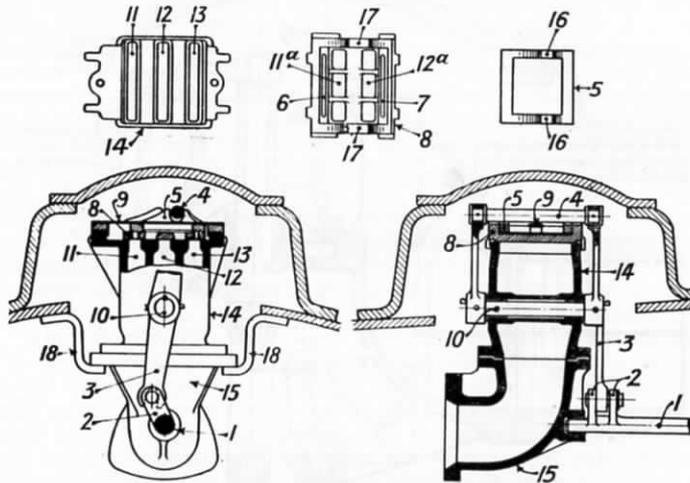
DETAILS OF L.M.S.R. REGULATOR VALVE AND FITTINGS IN DOME.
